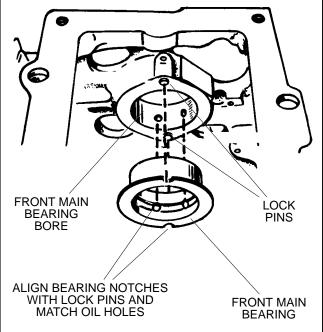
FRONT CRANKSHAFT BEARING
